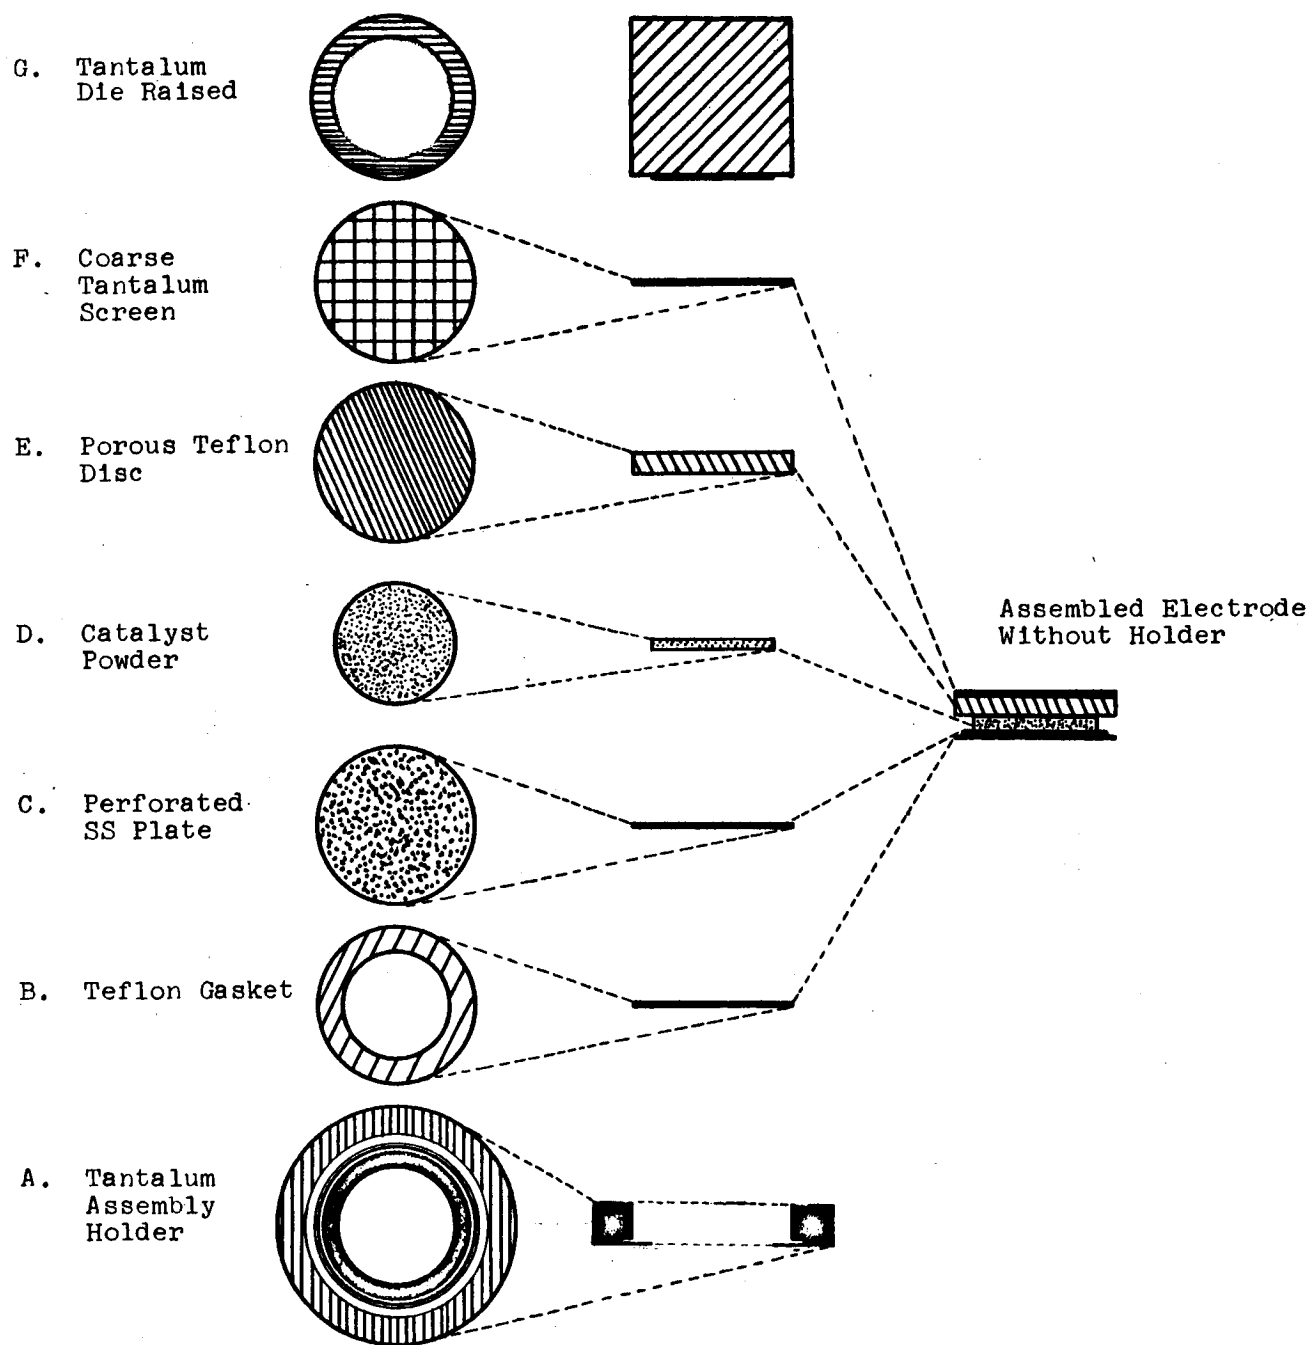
Exploded View of Porous Teflon Vapor Diffusion Electrode
